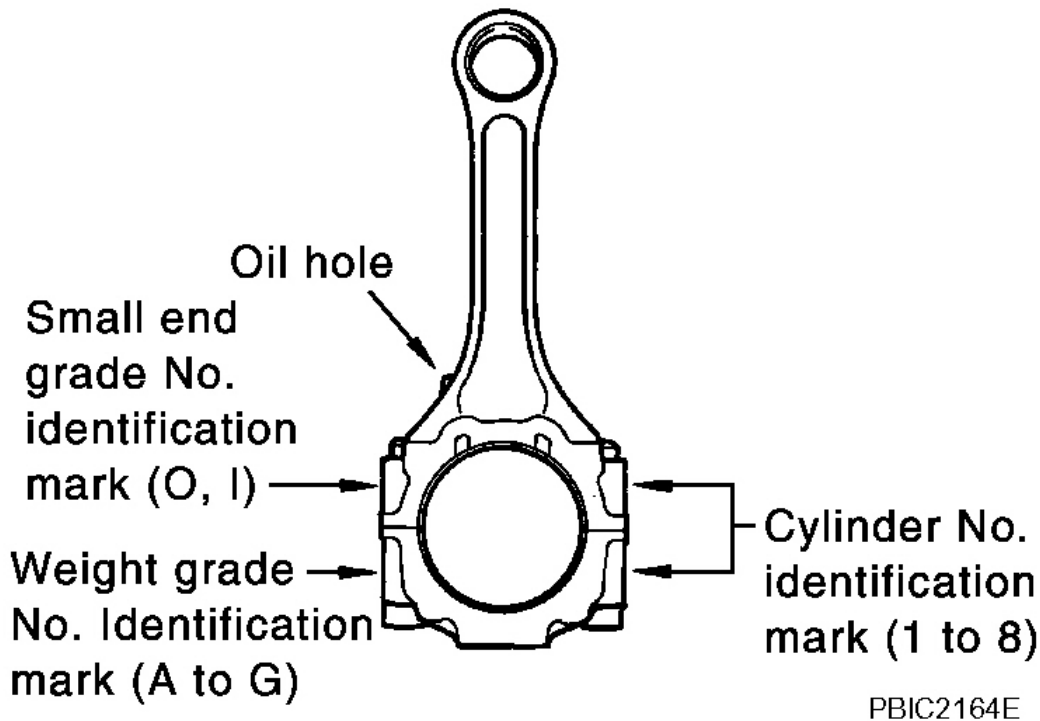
Identifying Connecting Rod Bushing Oil Clearance
